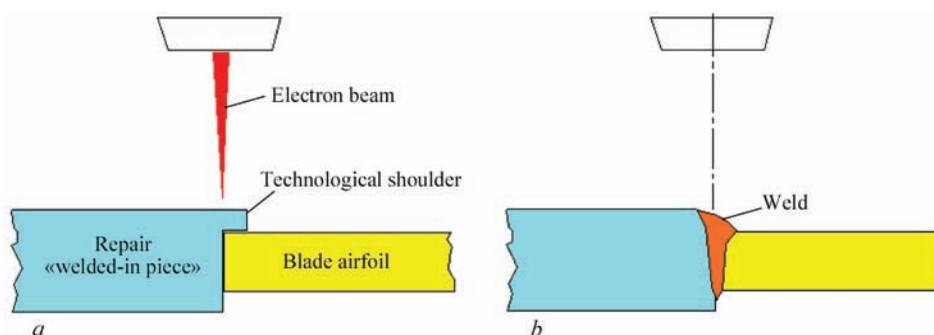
Scheme of repair EBW-joint of «welded-in piece» and blade airfoil: *a* — before welding; *b* — after
